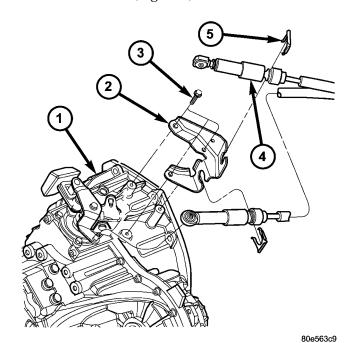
Gear Shift Cables and Bracket at Transaxle
